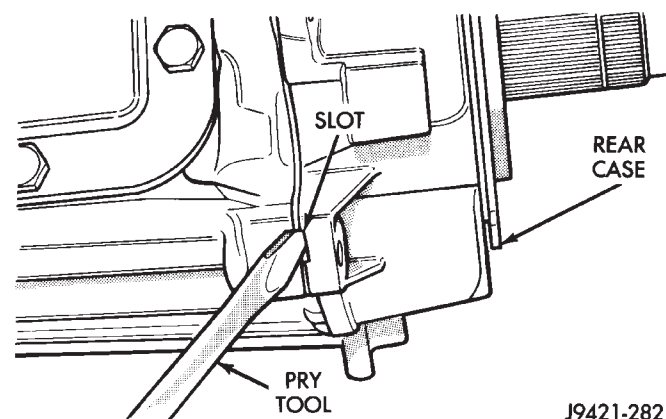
Loosening Rear Case (Breaking Sealer Bead)
